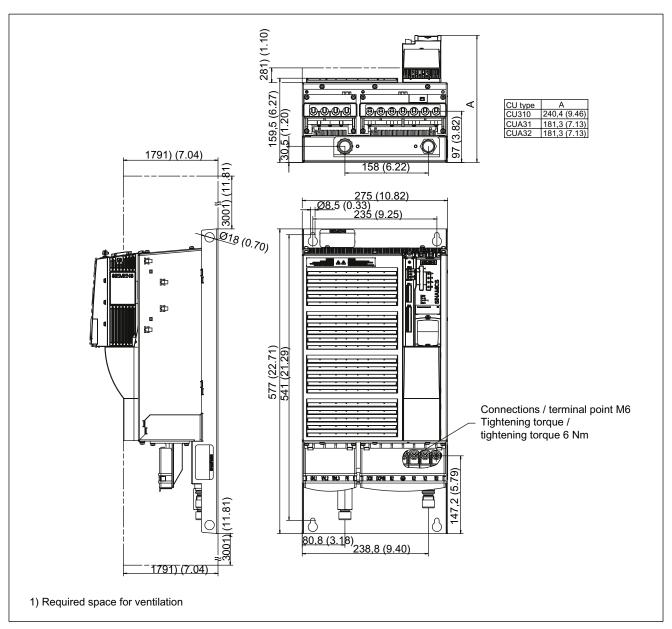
Dimension drawing: Power Module PM340, frame size FSE Liquid Cooled
